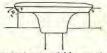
B. A valve-seat should never be wider than the face of valve, but should be narrower. A narrow radial seat (R) is theoretically preferable to a staight seat (S) because it will not wear to a wide
